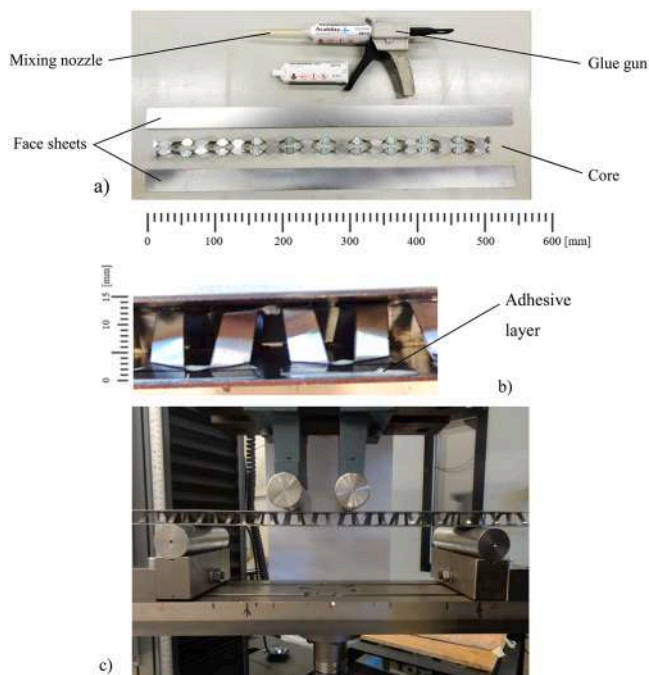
(a) Component elements of the sandwich assembly; (b) assembled sandwich structure; (c) position of the sandwich beam in the testing unit.
